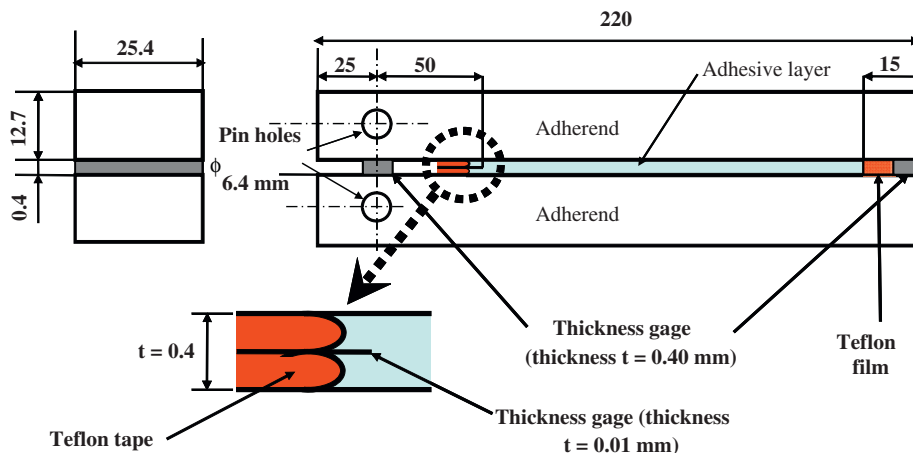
Shape and sizes of the adhesively bonded DCB specimen.
